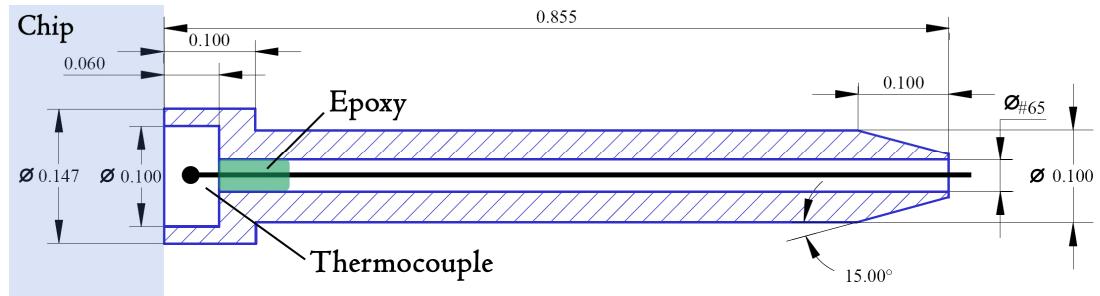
Drawings for the thermocouple spring loaded pin (the spring slides on the outside and his held in place with a gantry that lowers over the top of the chip). The thermocouple is suspended in a sealed chamber that makes contact with the chip directly over the FISH chamber. The temperature of the air chamber above the surface allowed the prediction of the temperature in the FISH chamber to within 1°C.
